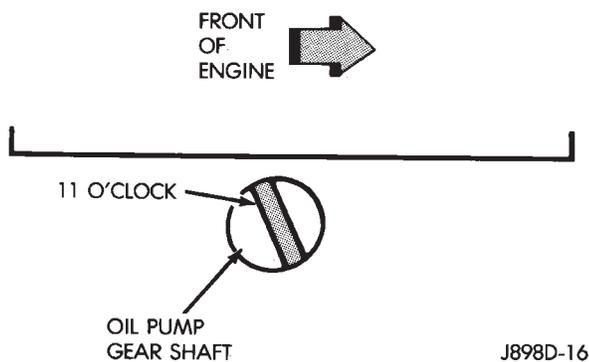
Align Oil Pump Gear Shaft—4.0L Engine
